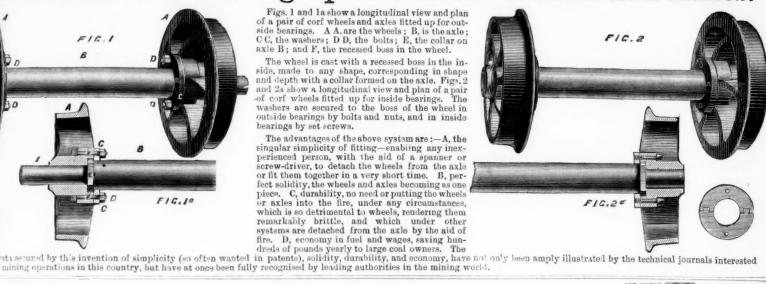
and 1a show a longitudinal view and plan of a pair of corf wheels and axles fitted up for outside bearings. A A, are the wheels; B, is the axle; C C, the washers; D D, the bolts; E, the collar on axle B; and F, the recessed boss in the wheel.
